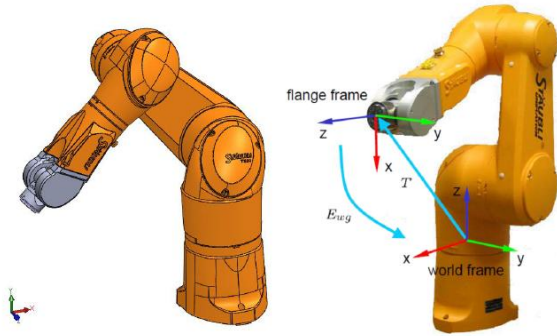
Stäubli Robot TX90 Real view and SolidWorks Design
